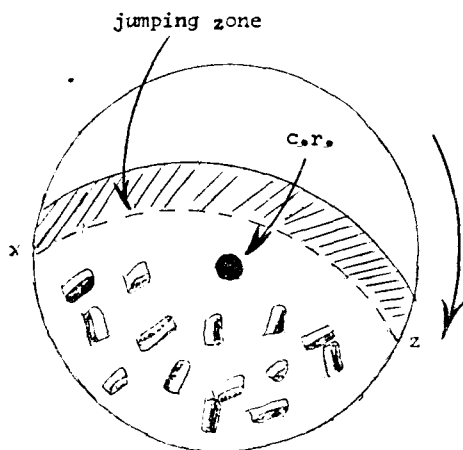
(a) Schematic cross section of rotating barrel (B) 14-20 r.p.m.
